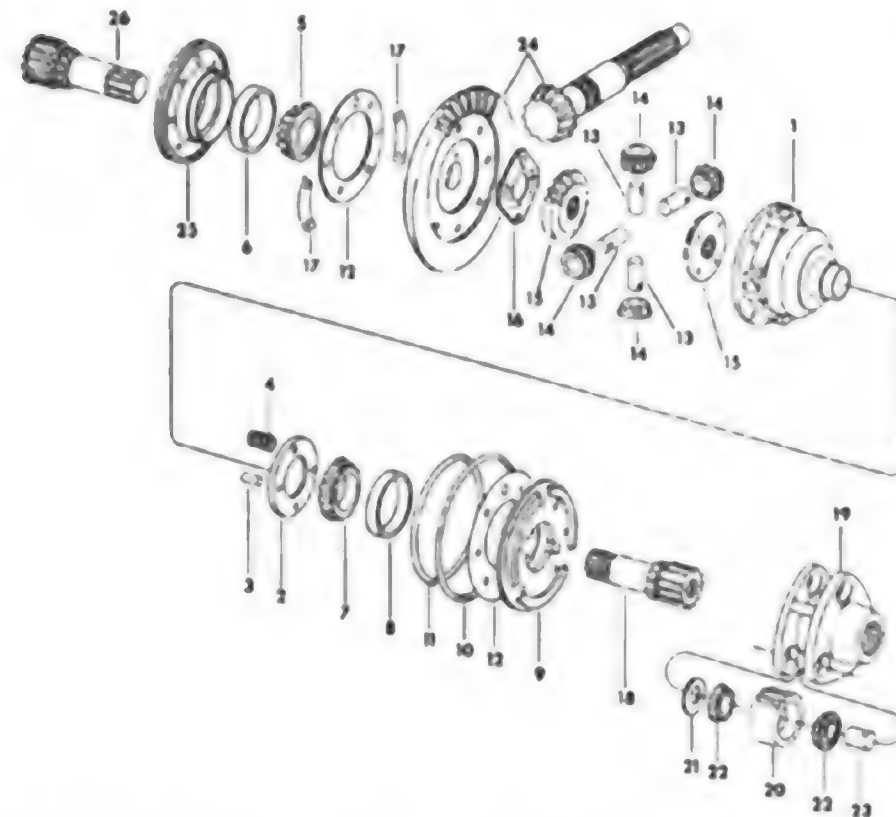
Exploded view of differential, planetary unit and associated parts used on Models 684, 784 and 884.
